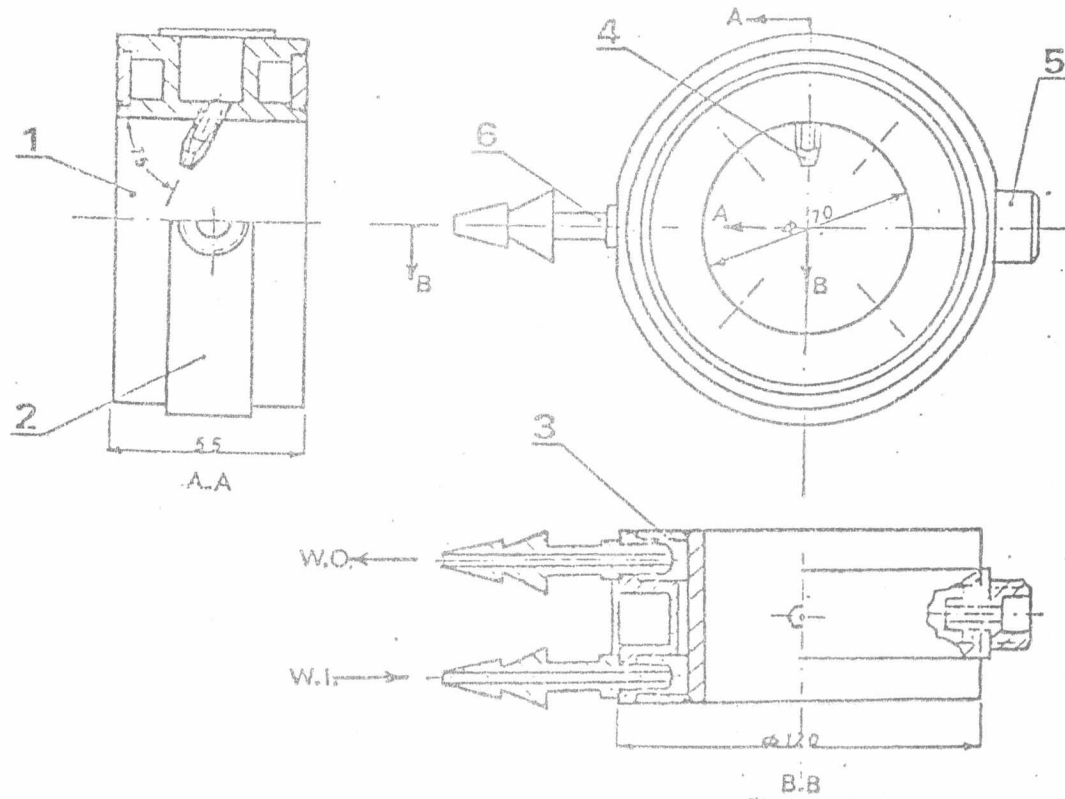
The specially designed ring burner used for diffusion welding
